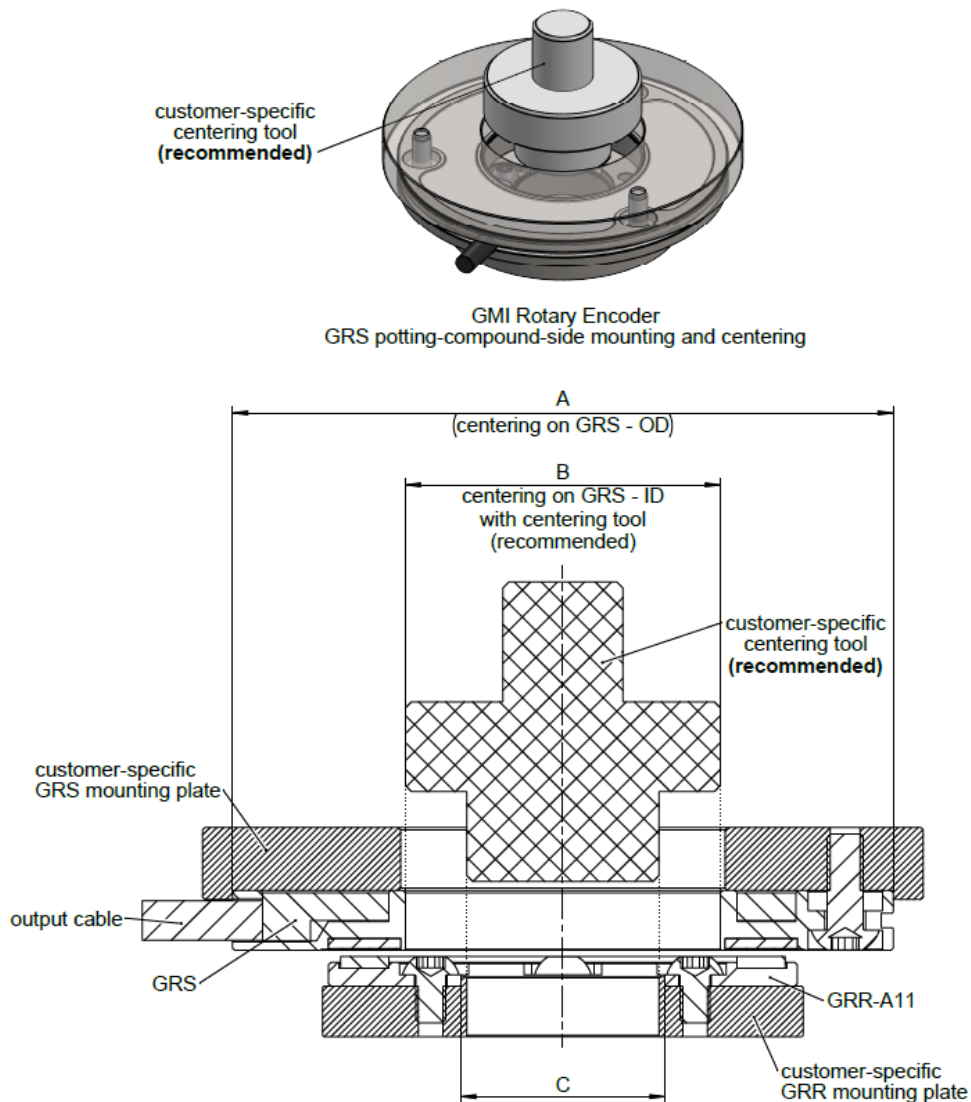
GMI Rotary Encoder: GRS potting-compound-side mounting and centering.
